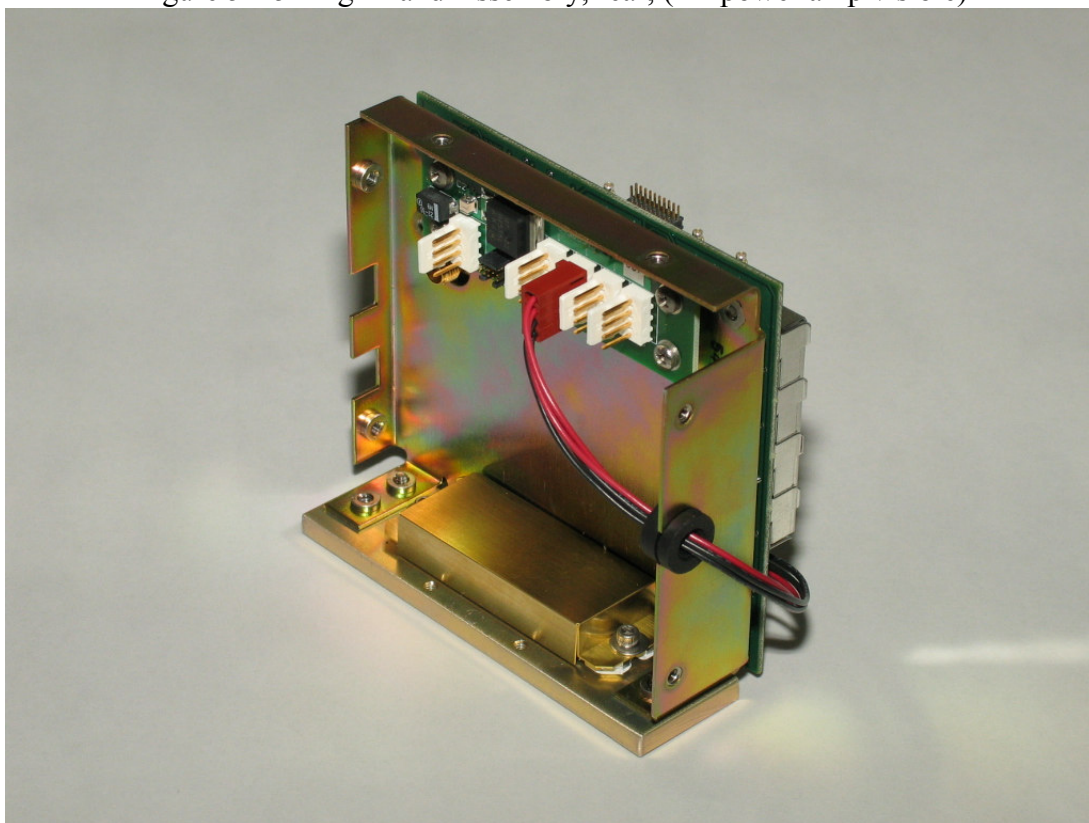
E-6 High Band Assembly, rear, (RF PA shield and DC power Distribution Board installed)
